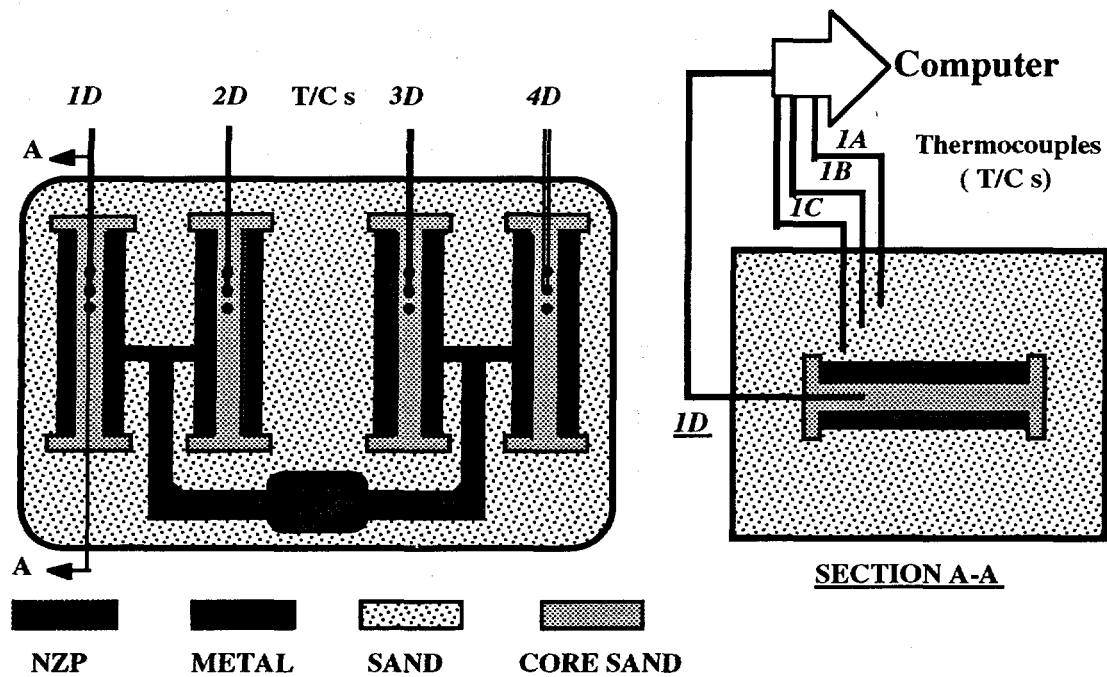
Detailed sectional view of the set-up for Metal Casting trials.
